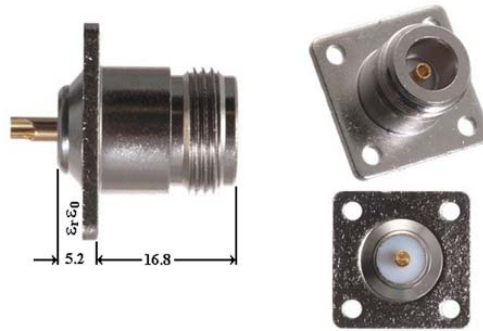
N Female Solder Chassis Mount Connector-RG58.
